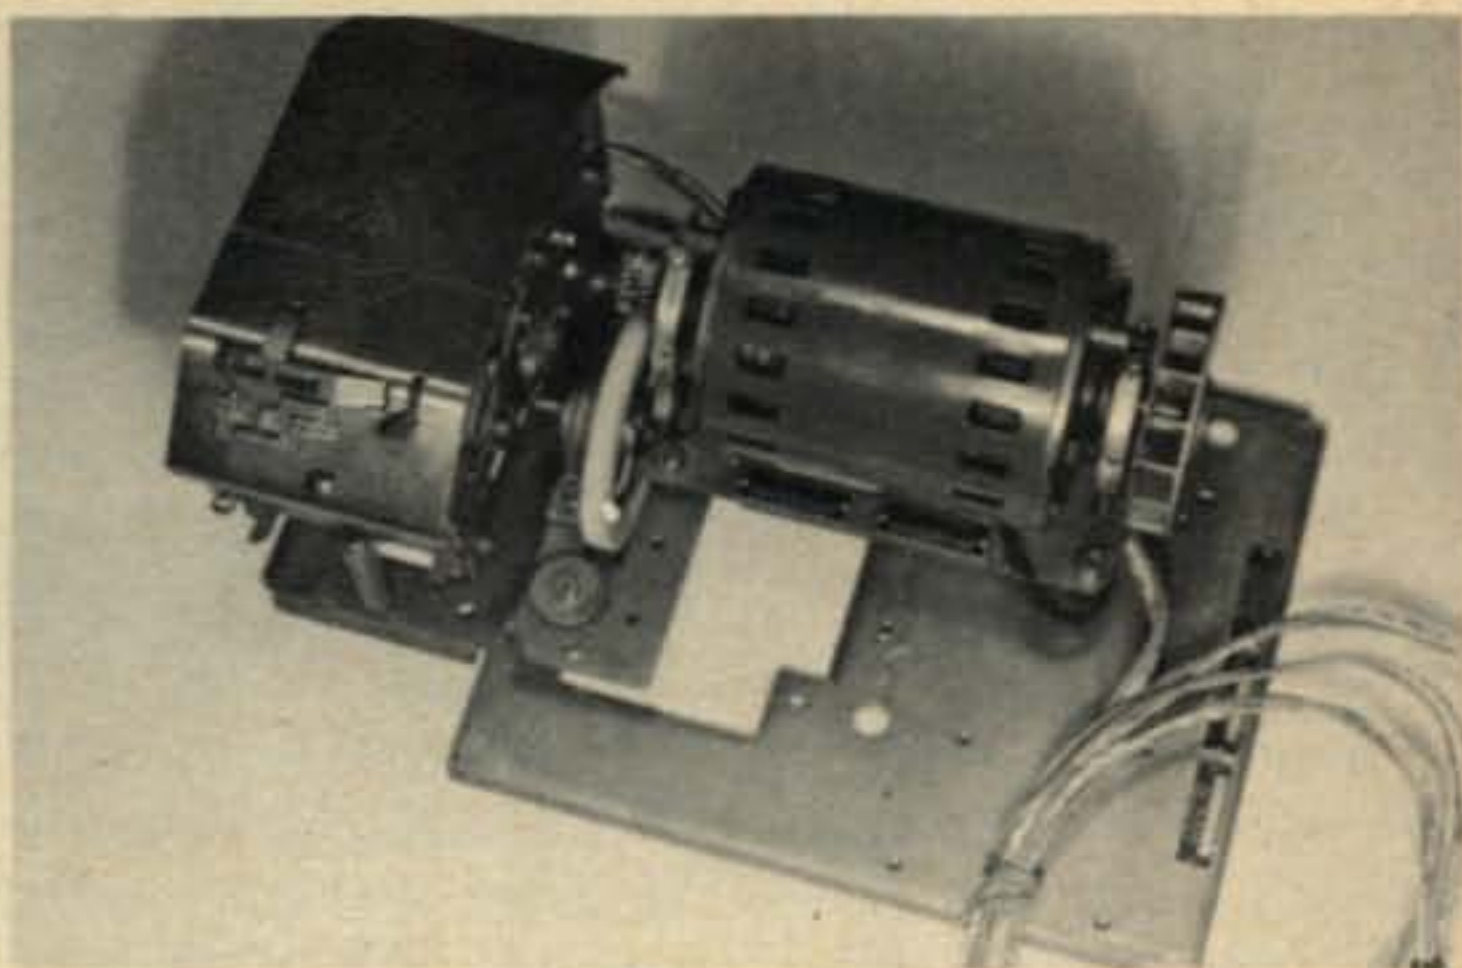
Model 34 ASR transmitter-distributor and base assembly, showing 3600 r.p.m. synchronous motor mounted so as to drive a 5-level TD on the #35 base insert.
